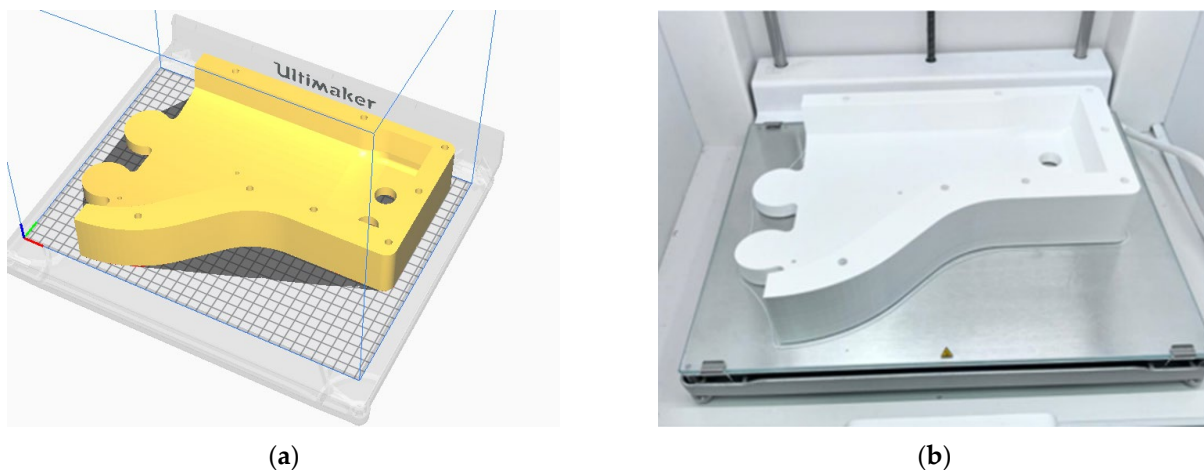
Manufacture of the mould sections. (a) Preparation for 3D printing of the mould sections. (b) Printed Section 3D of MAT-COMP V3-MALE1.
